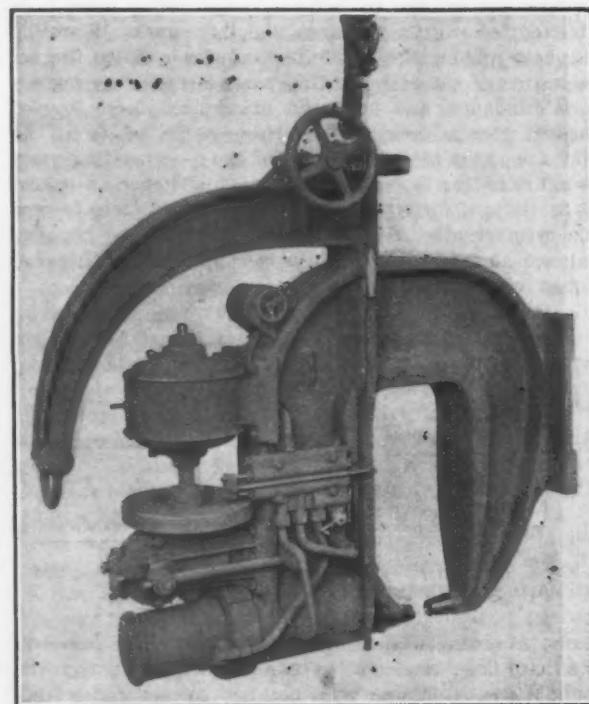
The Riveter Suspended to Rivet a Horizontal Seam from the Top.
